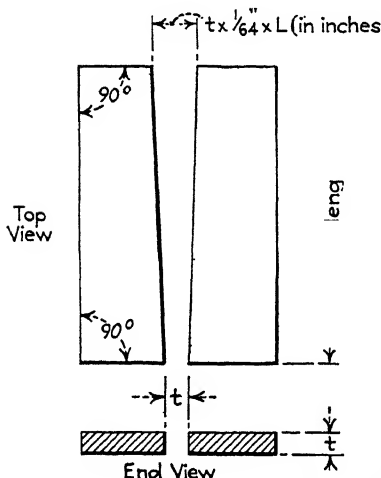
Allowance for shrinkage in steel plate welding.
